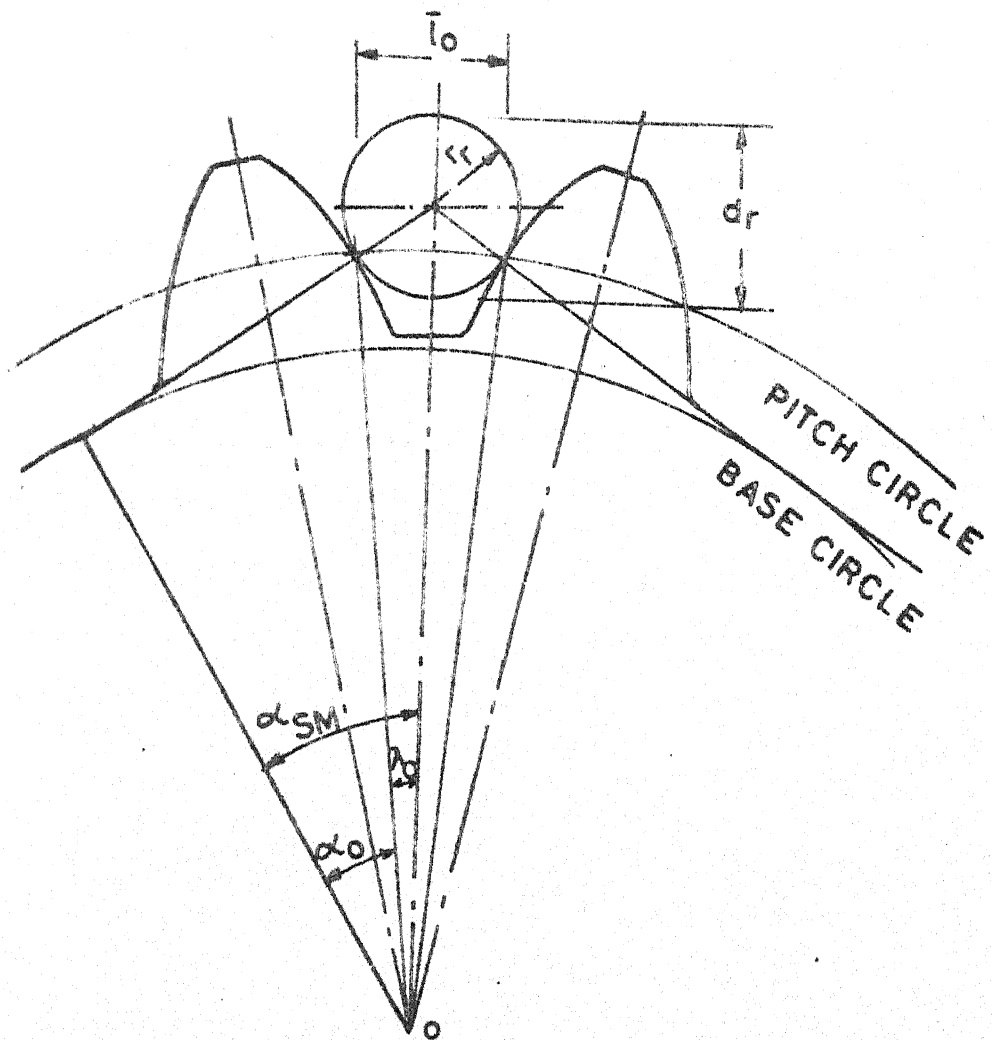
ROLLER MEASUREMENT FOR EXTERNAL GEAR
